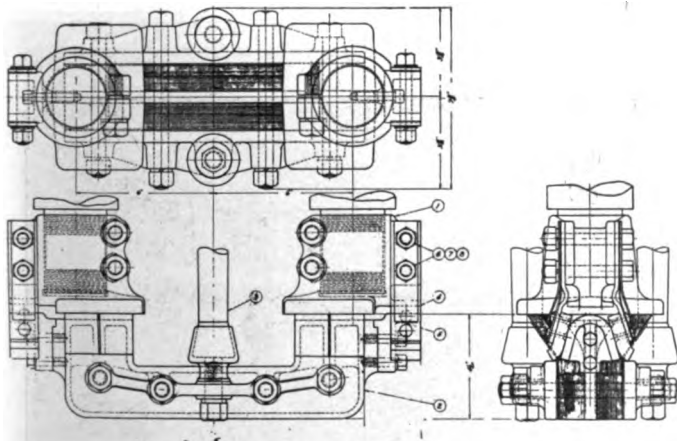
WESTINGHOUSE EL. & MFG. CO. OIL CIRCUIT BREAKER PARTS SHOWING IMPROVEMENTS. (FORMER DESIGN SHOWN IN FIGS. 9, 10, 14 AND 15.)
